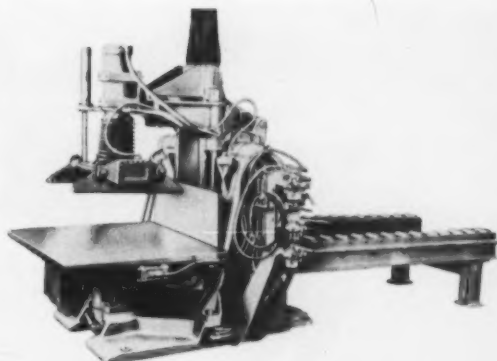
This jolt rockover machine has the mold drawing mechanism built into the rockover carriage.
